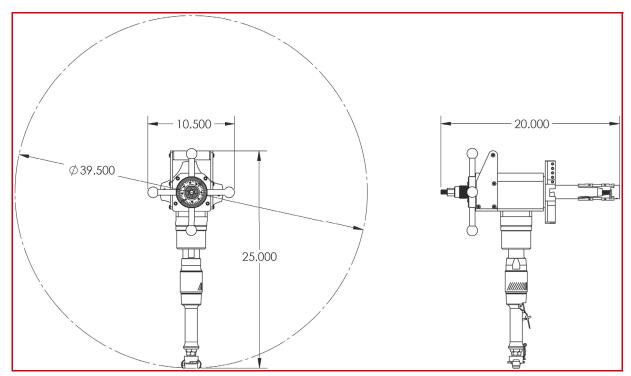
PB6 POWER BEVELER PNEUMATIC DIMENSIONS (P/N PB06PN)
